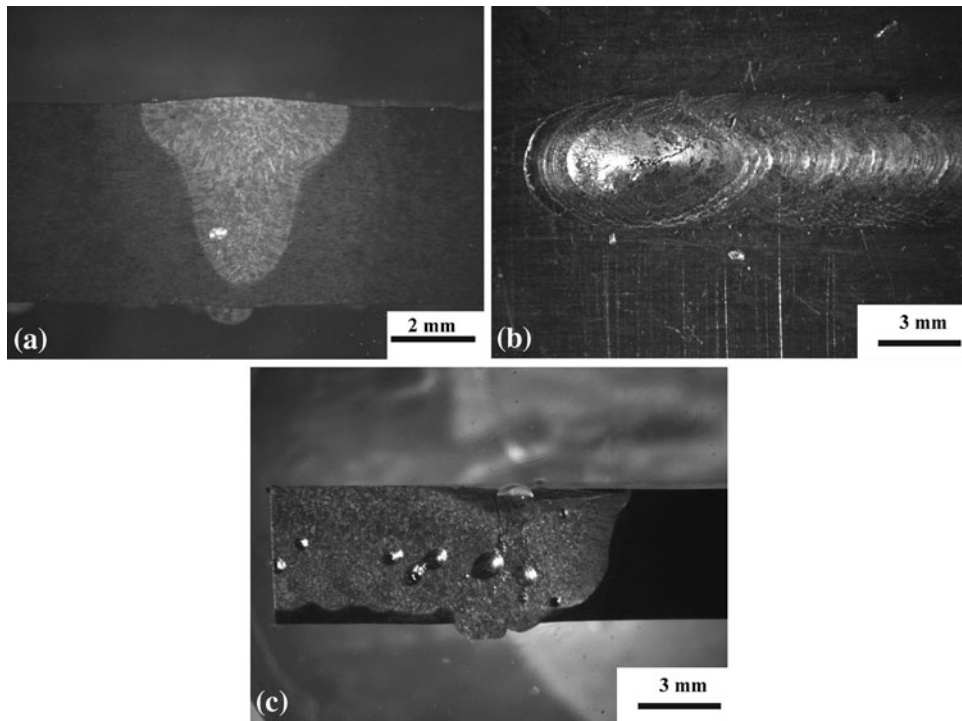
Laser beam weld of Al2139-T3 for energy deposition of 109 J/mm and beam focal point at top surface of workpiece. (a) Transverse cross section. (b) Top surface of workpiece. (c) Longitudinal cross section at symmetry plane. Beam power and welding speed are 3630 W and 2 m/min, respectively
